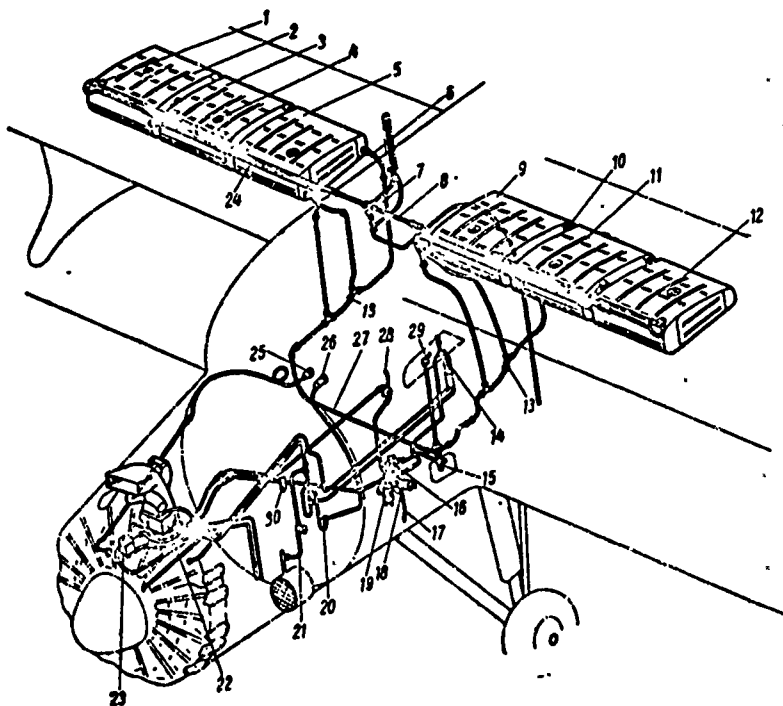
Fuel system (on aircraft from the 53rd series): 1 - filler neck; 2 - right cantilever tank; 3 - right central tank; 4 - fuel gauge pickup; 5 - right root tank; 6 - flexible hose; 7 - drain cock of drain system; 8 - drain line; 9 - left root tank; 10 - hose joint with check valve; 11 - left central tank; 12 - left cantilever tank; 13 - check valve; 14 - priming pump; 15 - four-way cock; 16 - three-way cock; 17 - drain tube; 18 - fuel pump BPK-4; 19 - sump filter; 20 - fuel pressure transmitter; 21 - magnetic valve EKR-3; 22 - carburetor; 23 - fuel pump BNK-12BK; 24 - system servicing line from BPK-4; 25 - pressure and vacuum gauge; 26 - three-pointer indicator; 27 - feed line; 28 - hand pump RNA-1A; 29 - control handle of four-way cock; 30 - secondary filter.
